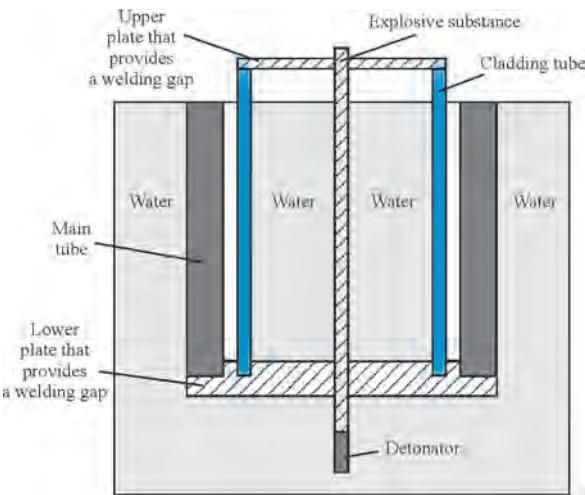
Explosive welding of coaxially arranged tubes
